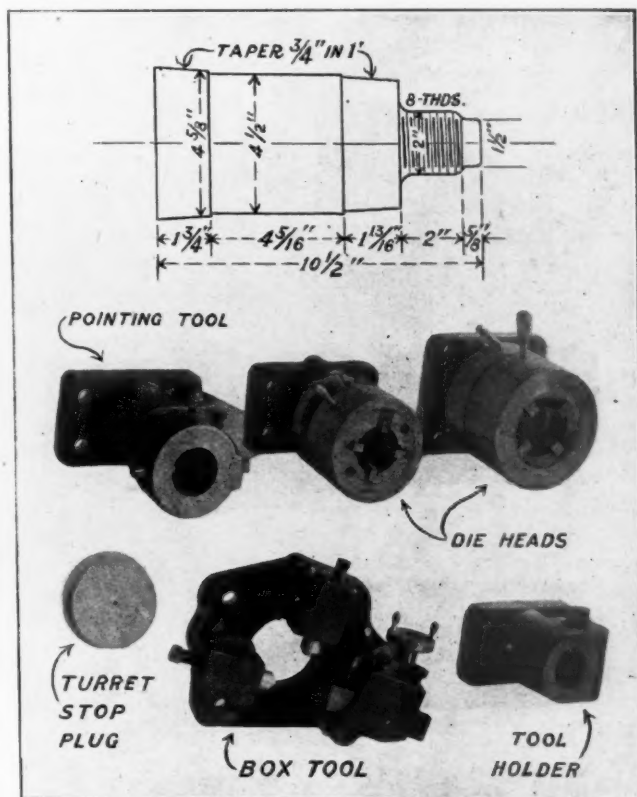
WRIST PIN AND TOOLS USED TO MACHINE THREADED END.
